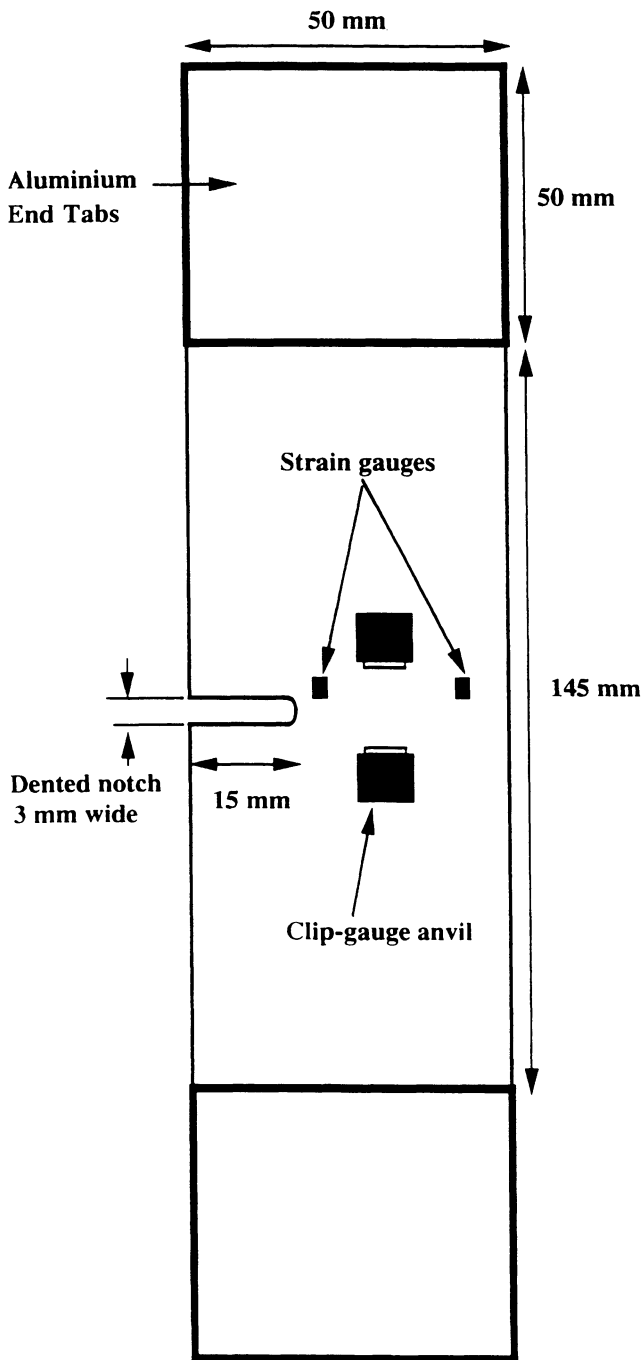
Specimen geometry. Gauge length of clip gauge is 10 mm
